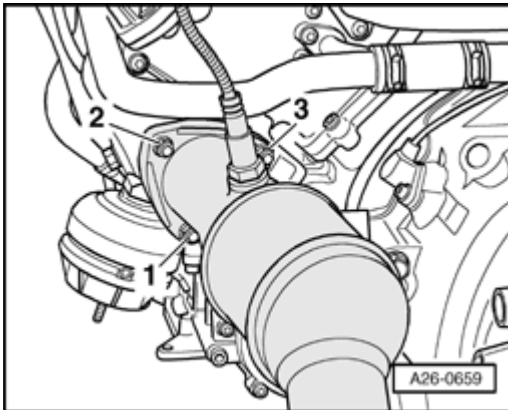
Removing/Installing Nuts For Left Front Exhaust Pipe/Exhaust Manifold
